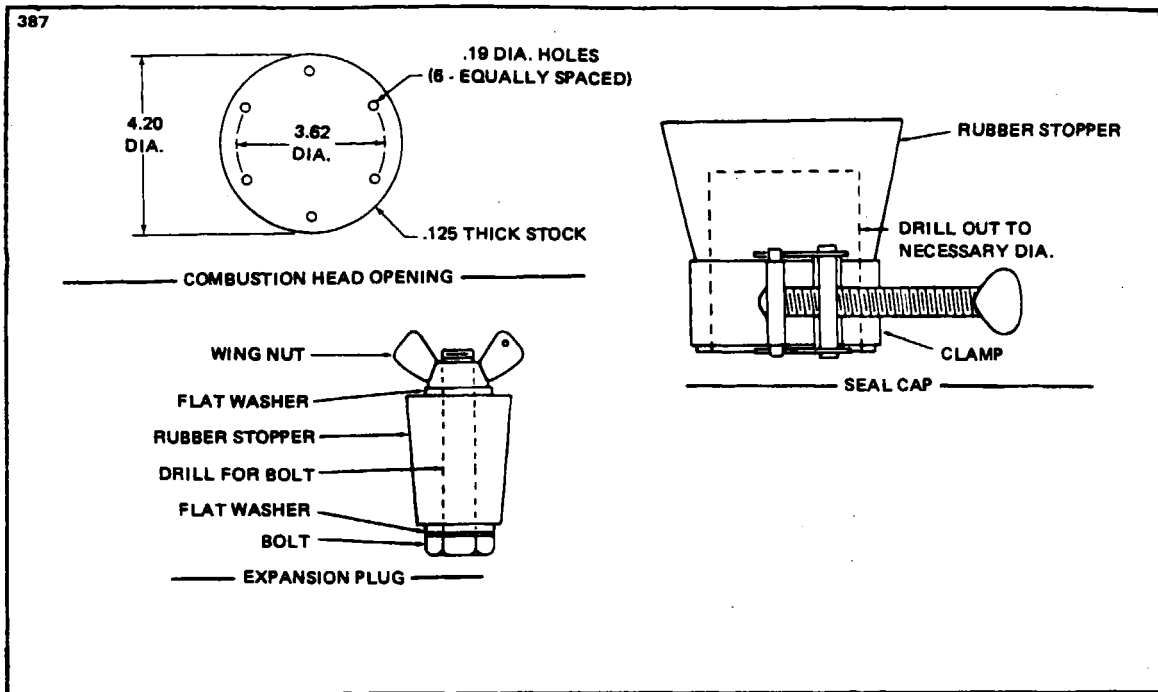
Suggested Design for Seal Plate, Plugs and Caps for Combustion Tube Leakage Test
